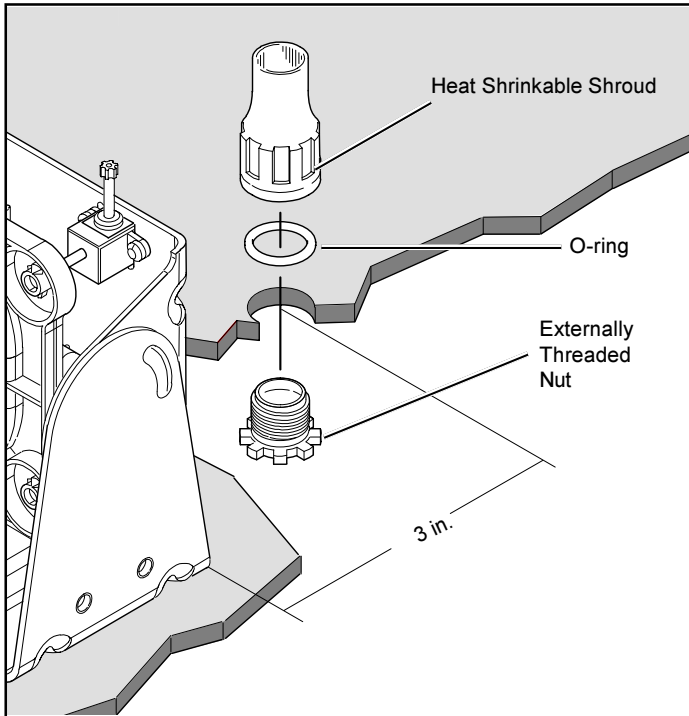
Heat Shrinkable Shroud Assembly (camera harness not shown)
